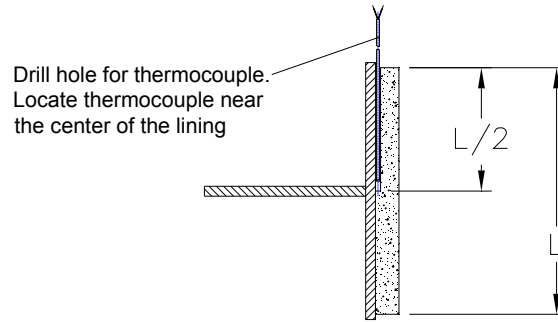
DRAWING OF THERMOCOUPLE LOCATION - DRUM BRAKE
